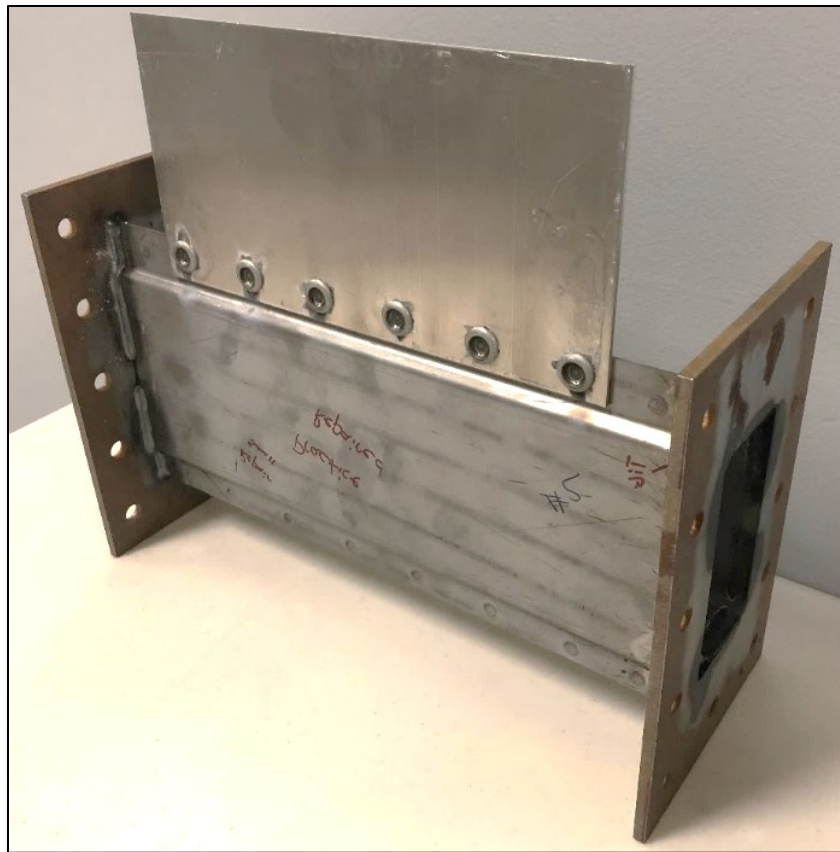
Assembled Step 1 demonstrator prior to mechanical testing. Source: Honda.
